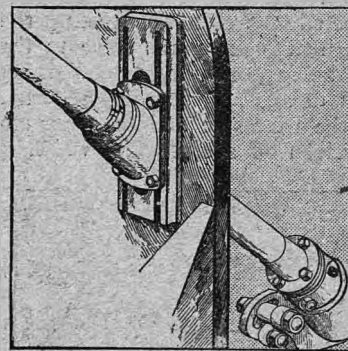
The adjustable rake steering. The column is secured by the dashboard bracket and four bolts, while the steering gear box is locked by means of the serrated quadrant.
